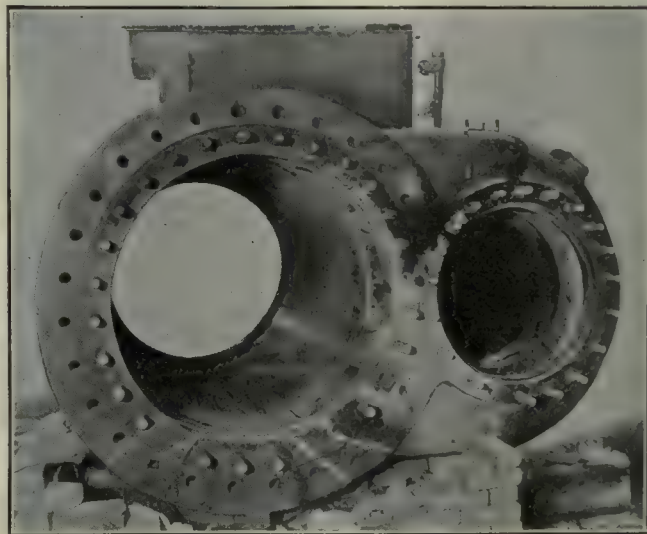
FLANGE WELDED ON THE 5-TON HIGH-PRESSURE CYLINDER
